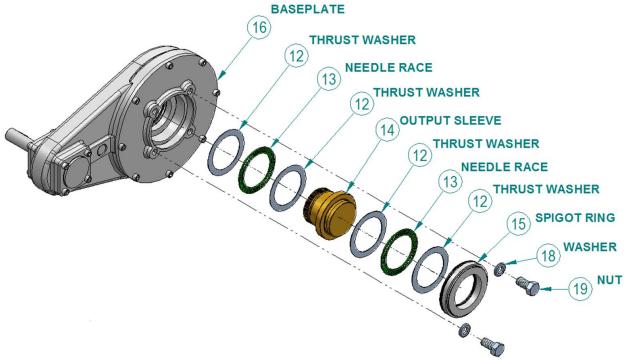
HOB/MPR / HOS/MPR Output Sleeve Assembly
